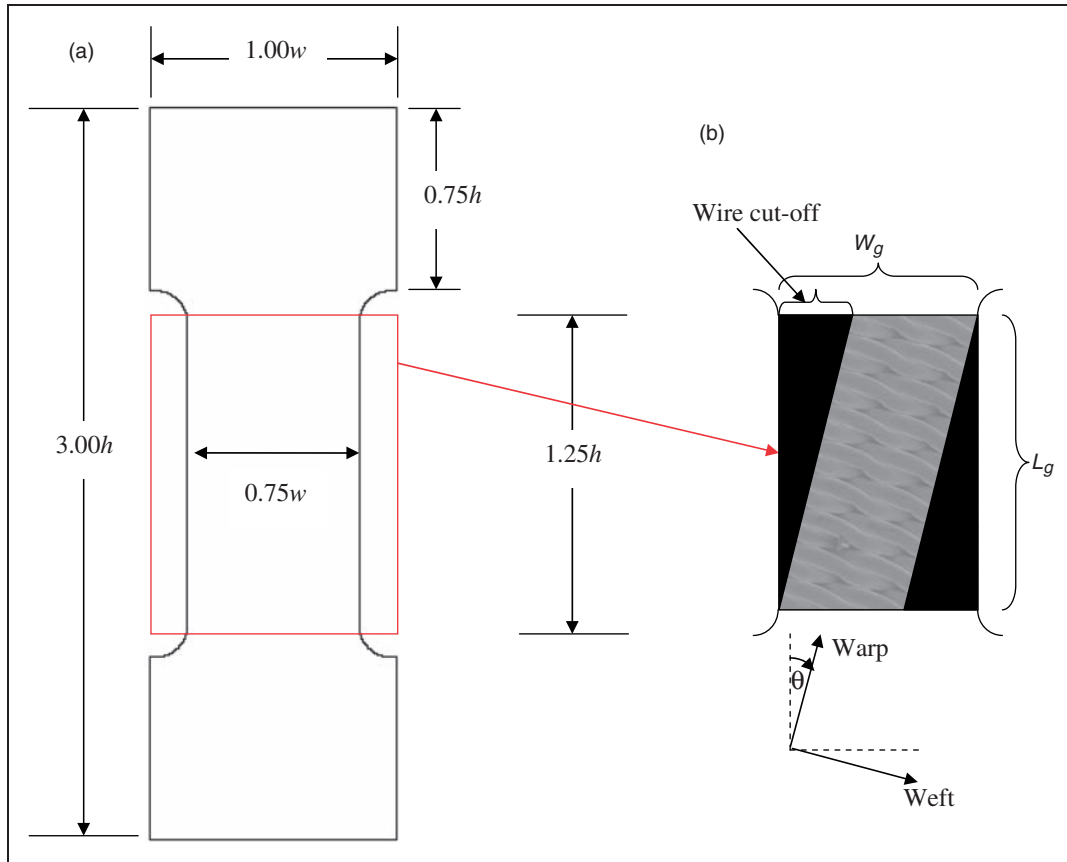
a) Sketch of the incised test specimen used for tensile experiments of the 316 L stainless steel 325×2300 woven wire mesh; $w = 1.00$ in (25.4 mm) for single wide and 2.00 in (50.8 mm) for double wide specimens, $h = 1.00$ in (25.4 mm) for all specimens; b) gauge section of the tensile test specimens.
